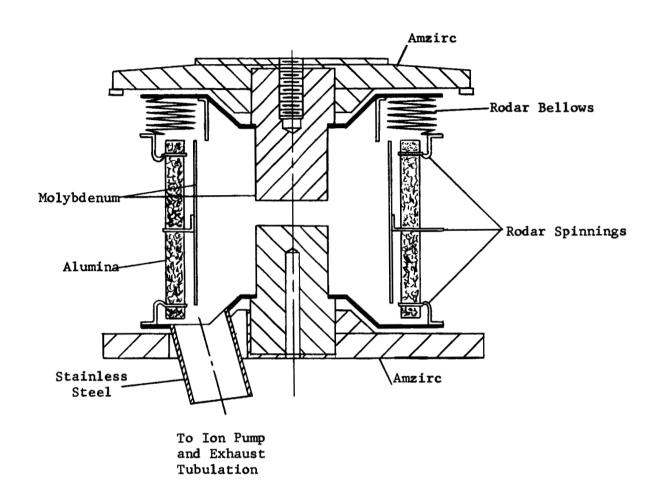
Sketch of Vacuum Capsule for Both AC Breaker and DC Contactor.
